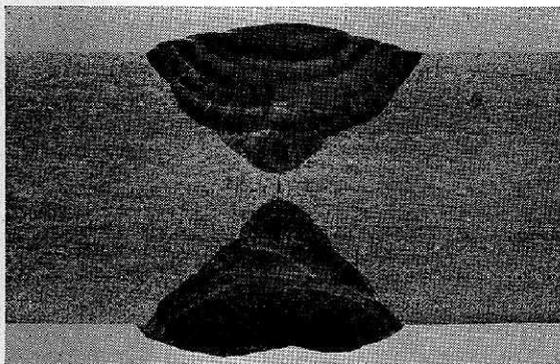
(H. 2354) — MACRO-SECTION OF BUTT JOINT IN $\frac{3}{8}$ IN. THICK MONEL PLATE. DOUBLE-VEE PREPARATION. LACK OF ROOT PENETRATION AT CENTRE OF JOINT ($\times 3$)
